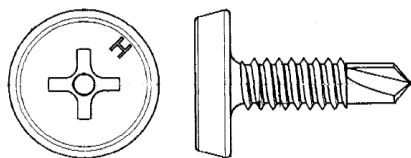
PHILLIPS PANCAKE HEAD (PPCH) SCREW
